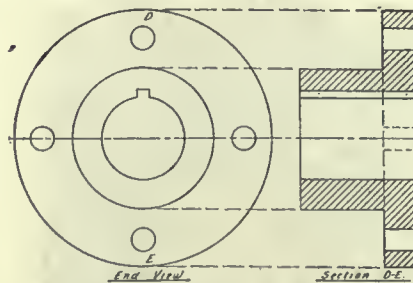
SHOWING CUTTING PLANE OF QUARTER SECTION.
